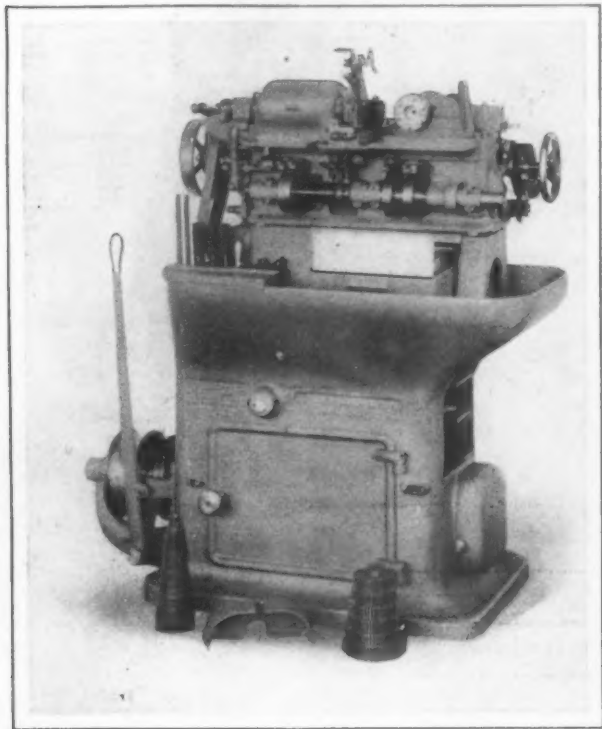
An Automatic Screw Machine with a New Drive in Which the Overhead Countershafts and the Numerous Belts Have Been Eliminated
